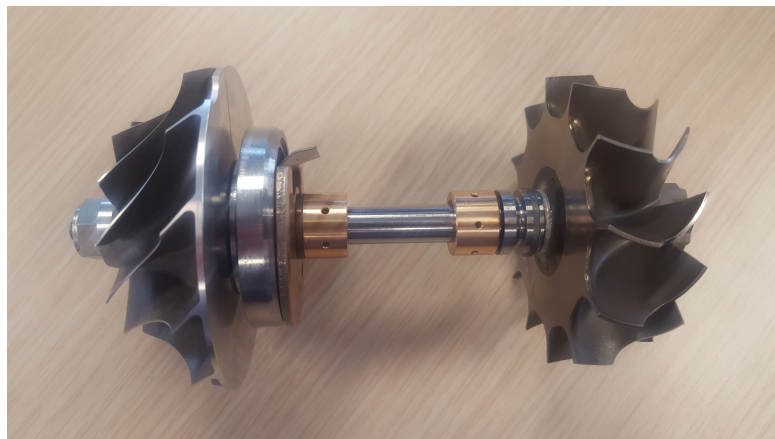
Turbocharger rotor, with 2 radial floating ring bearings and one axial bearing
